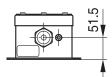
B84299C2060B003 (2 \times 6 A), B84299C2160B001 (2 \times 16 A)
